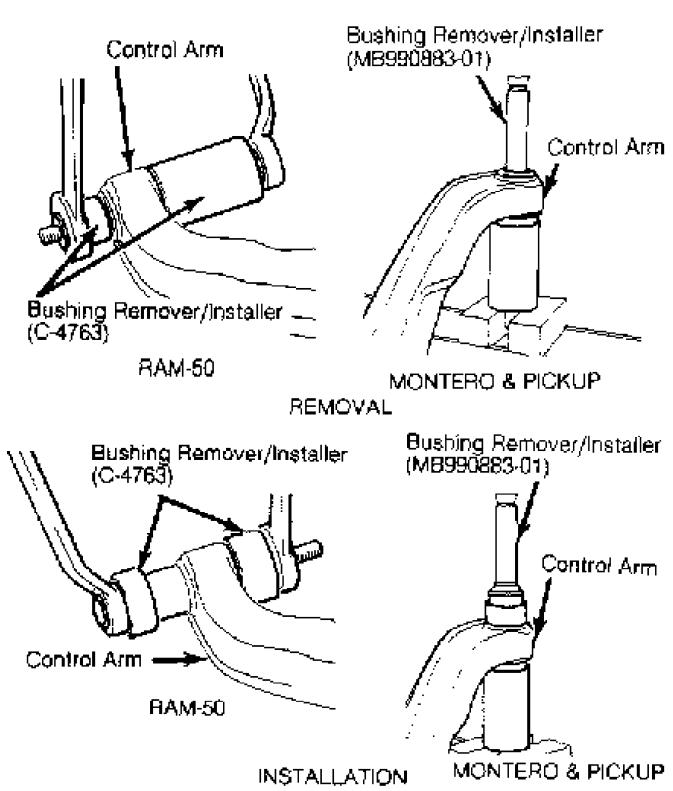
Replacing Lower Control Arm Bushing Courtesy of Mitsubishi Motor Sales of America.
